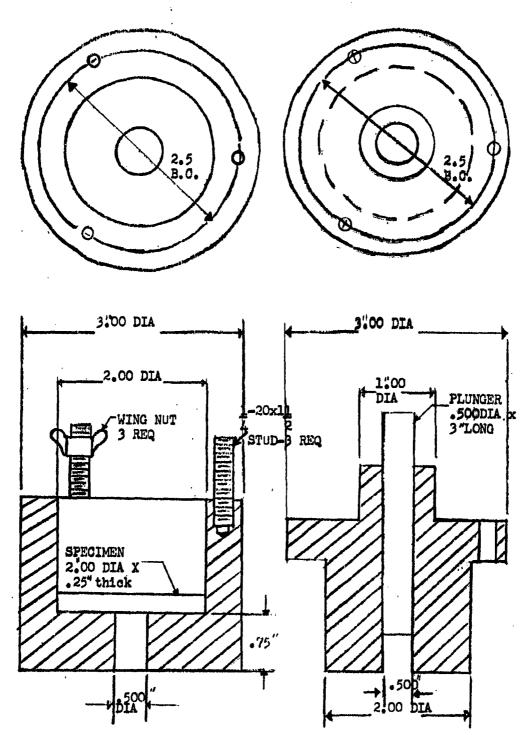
Shearing Tool for 2-In. by 0.5-In. Thick Specimen.
